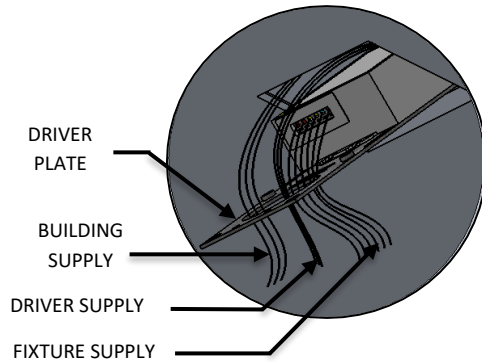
DETAIL SHOWING BUILDING SUPPLY AND DRIVER WIRE
